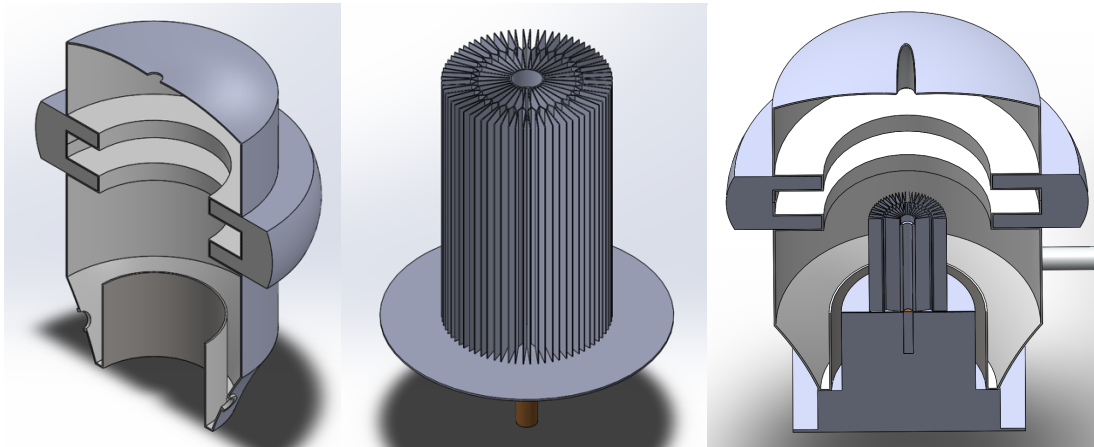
BAM cryocooler design. (a) Cryoshell housing cutaway, (b) tuning fork cold head design used to capture atmospheric CO₂ in the cryopump system, and (c) coldhead integrated into cryoshell [128].
